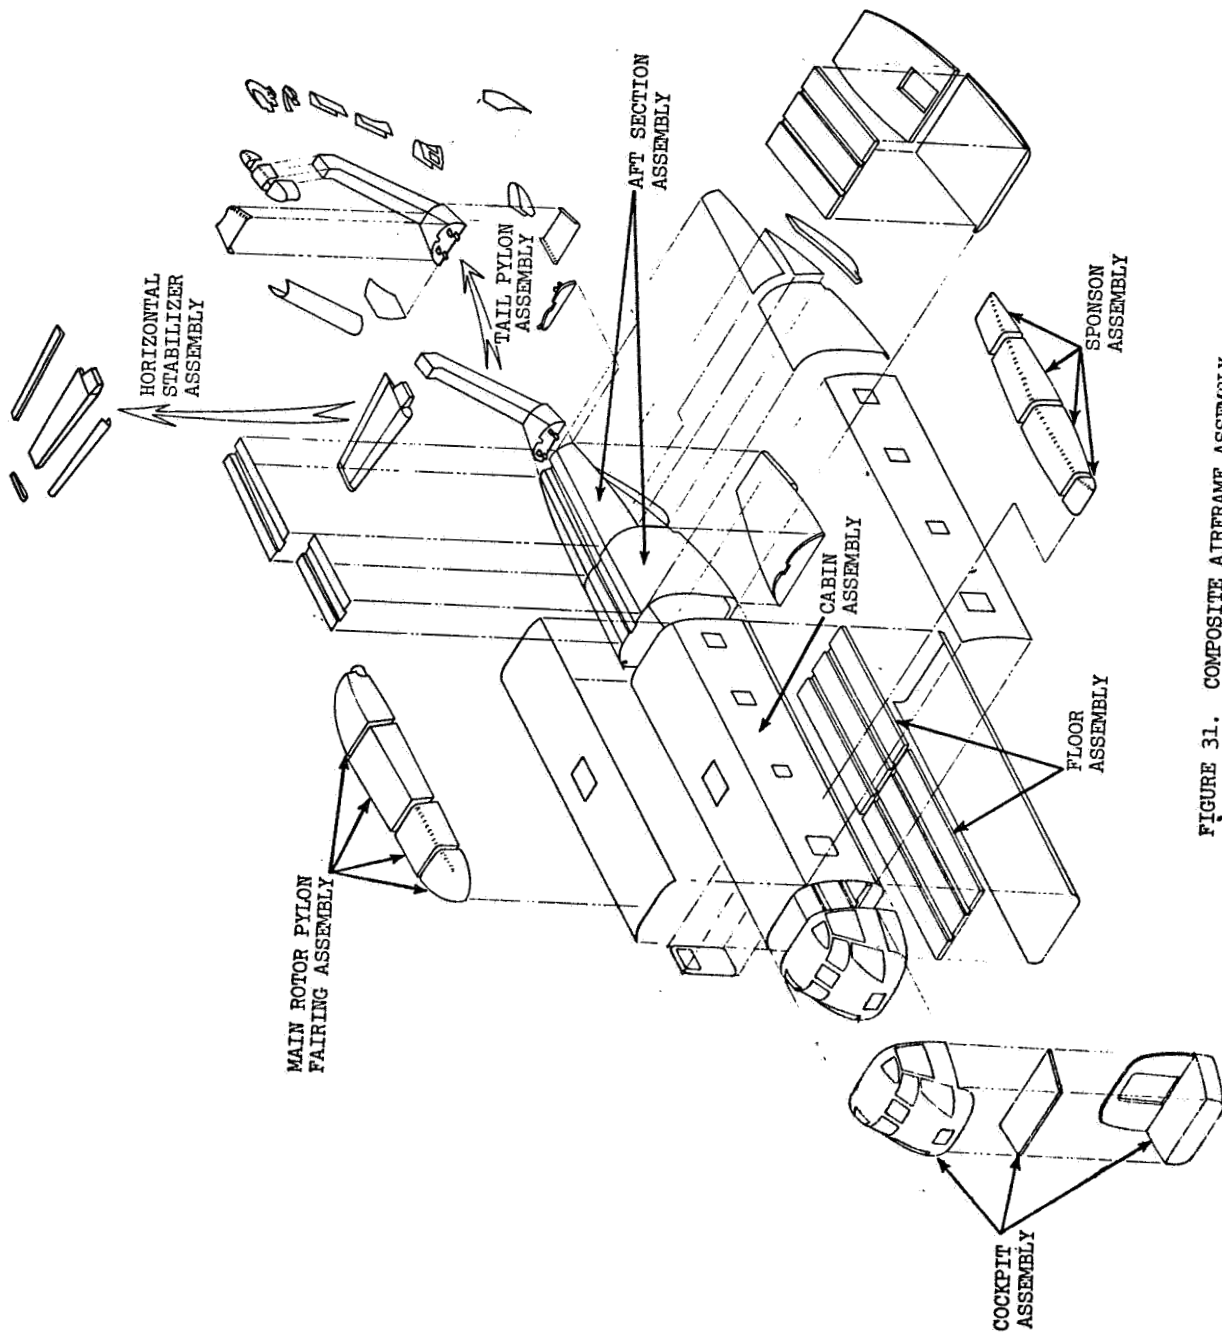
COMPOSITE AIRFRAME ASSEMBLY.
